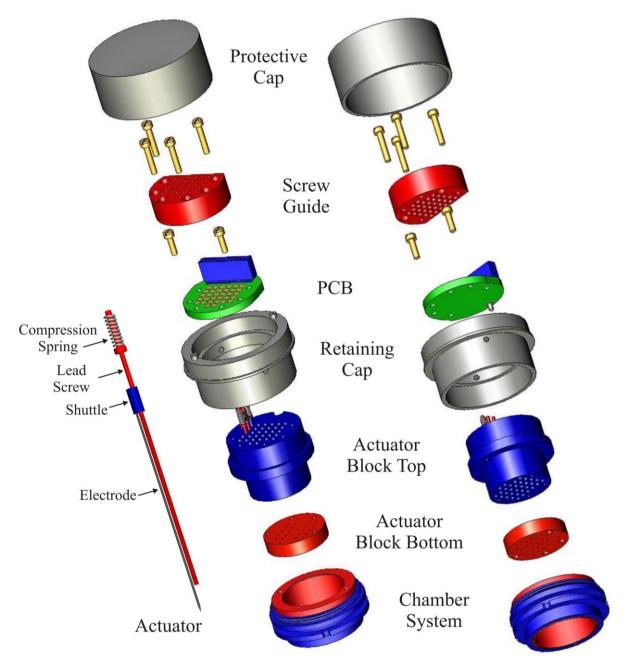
Exploded view of the 32-chn semi-chronic microdrive system (SC32-1) and an assembled chamber system (RC1).
